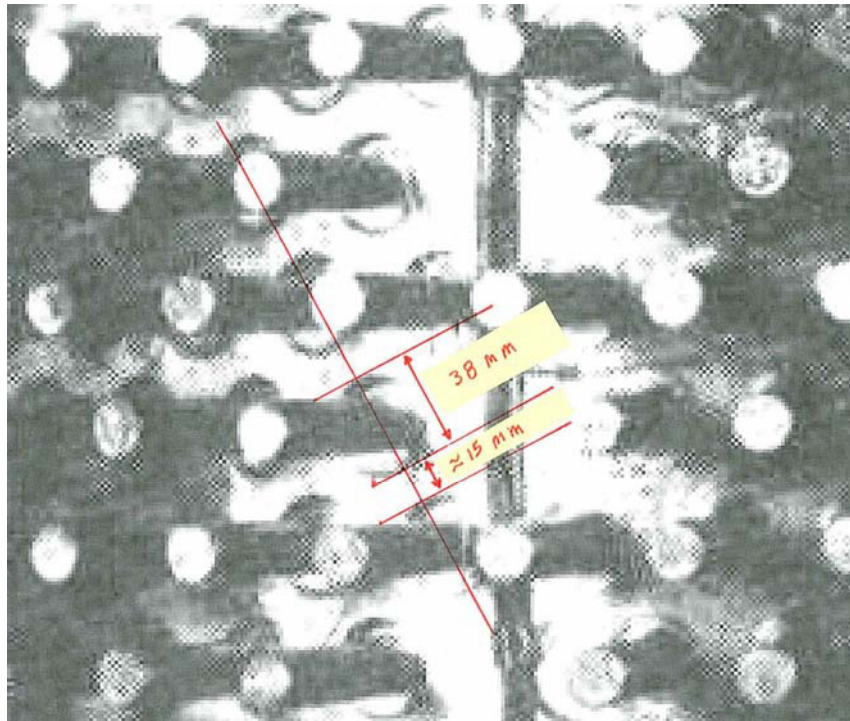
Detail of hot header from KVK tests (from Ref. 112)
